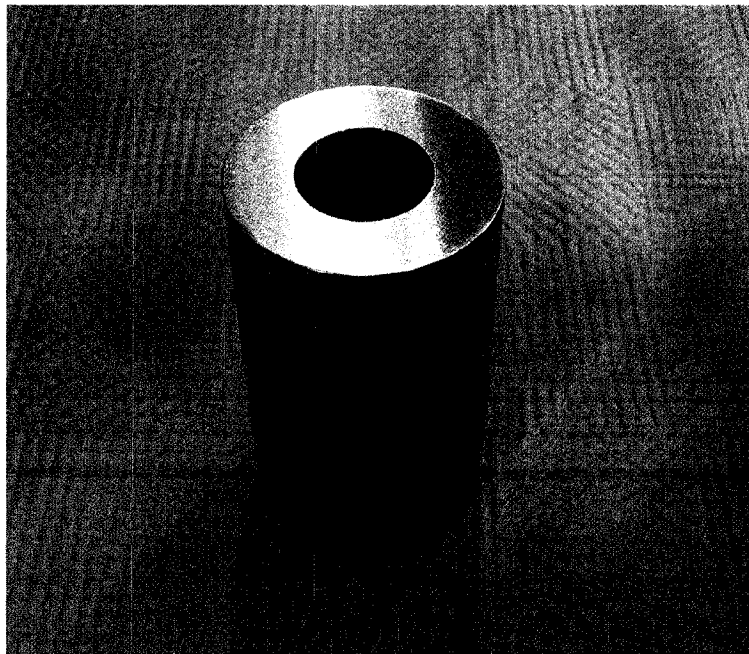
Inconel 718 Test piece for friction welding
